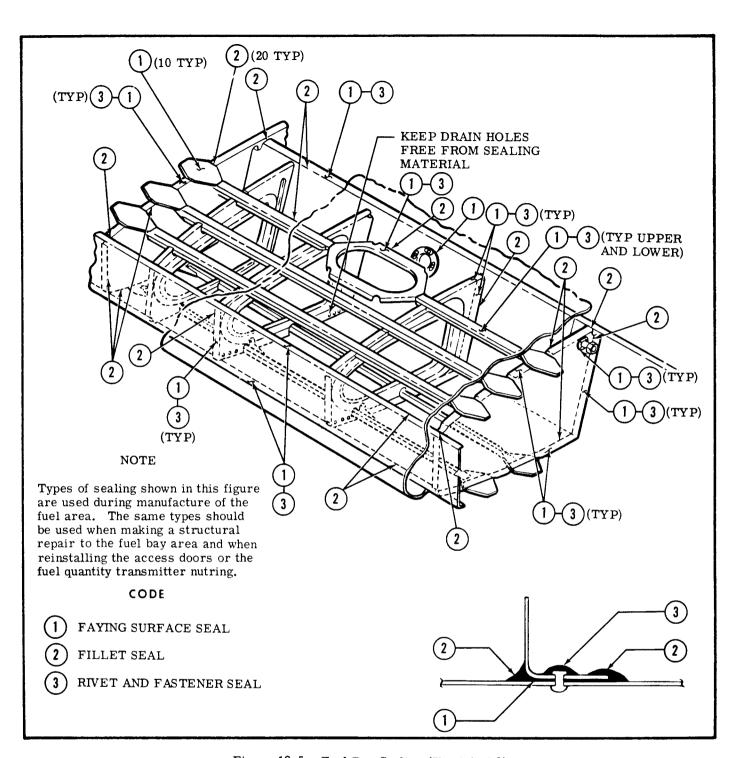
Fuel Bay Sealing (Sheet 1 of 2)
